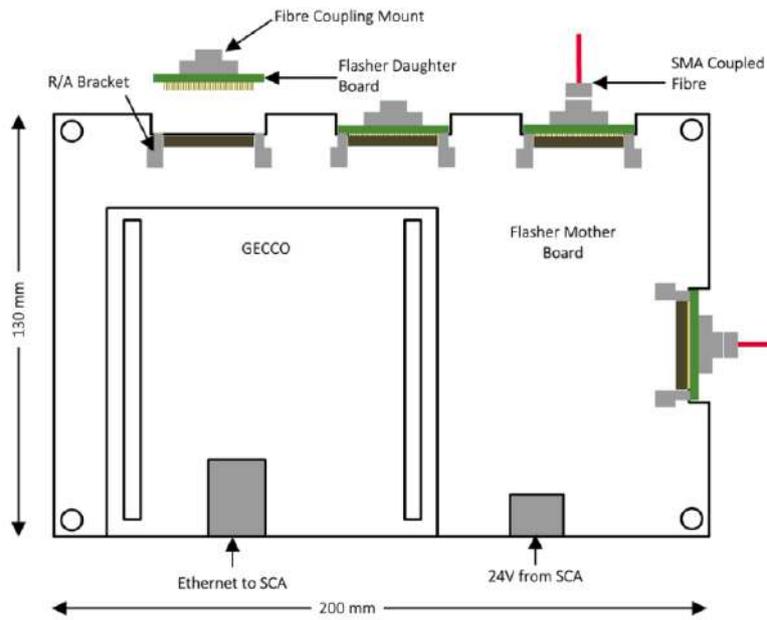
Currently envisaged geometry of the Flasher Mother Board.
